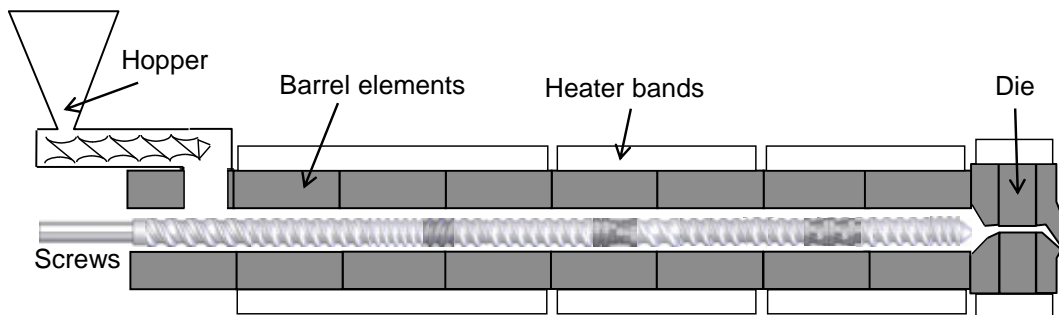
Co-rotating twin-screw extruder: example of machine layout.
